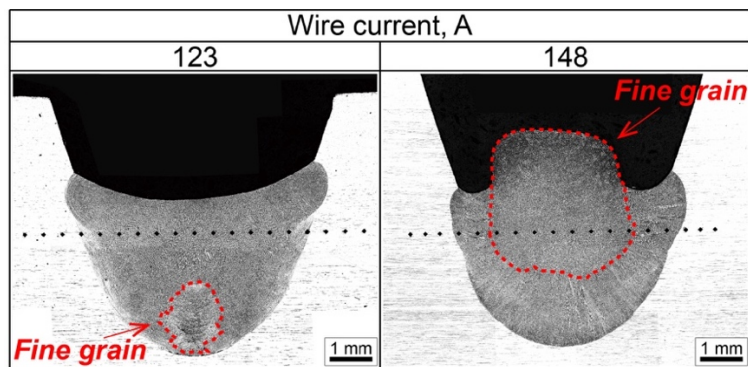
Cross-section of weld bead using Vickers hardness test.
